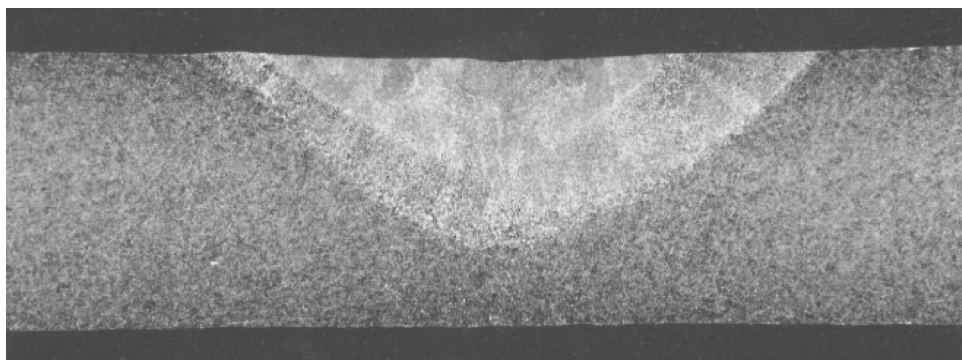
Al 1100 bead-on-plate weld (sample 1-6-E-11), $\times 12.5$.
